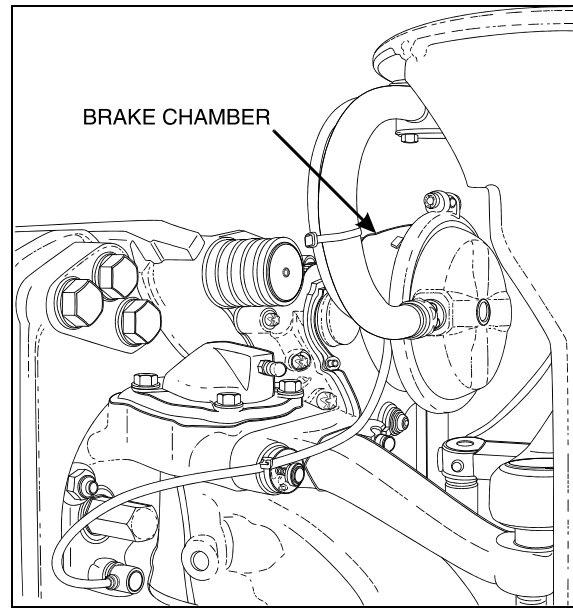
FRONT AXLE BRAKE AIR CHAMBER 12158
